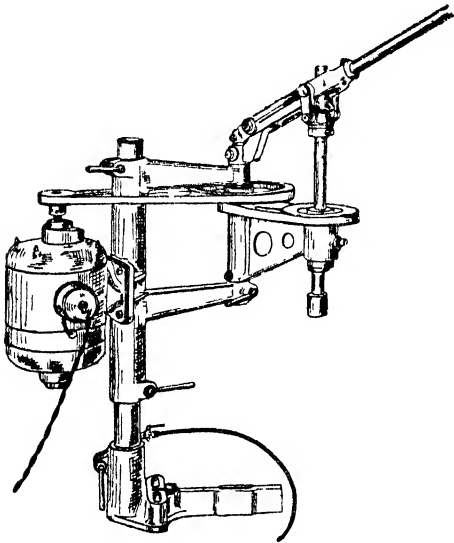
A Special Cylinder Head Machine for use with Cylinder Hones.
